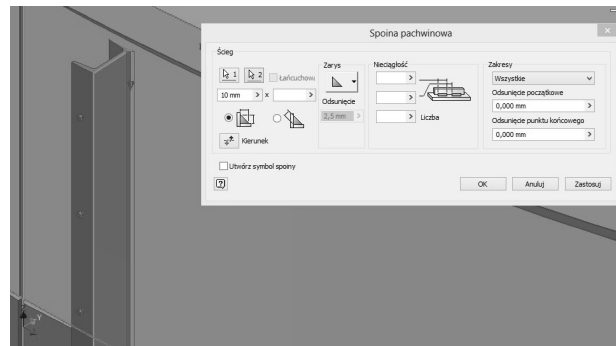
Creation of continuous fillet weld connecting the tank’s shell with the channel section [own elaboration]
